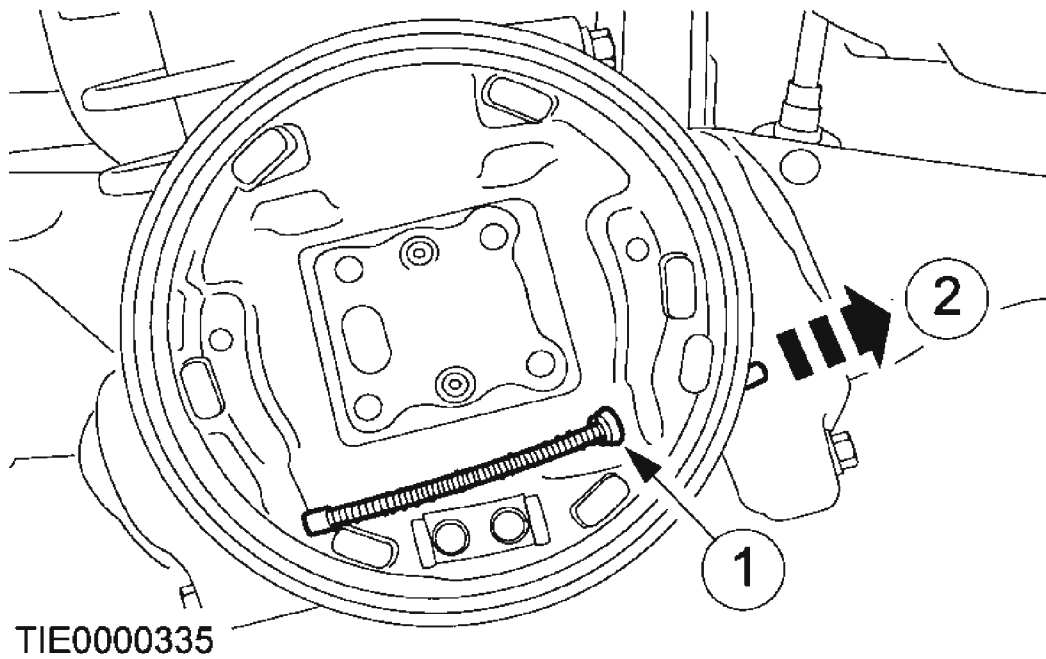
Removing Retaining Clip And Parking Brake Cable
